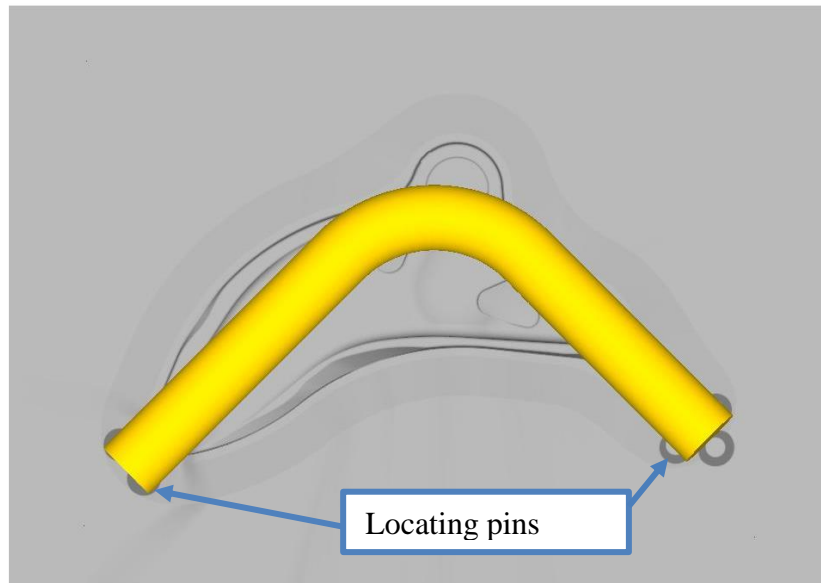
Bent cylinder placed on the lower die on locating pins.
